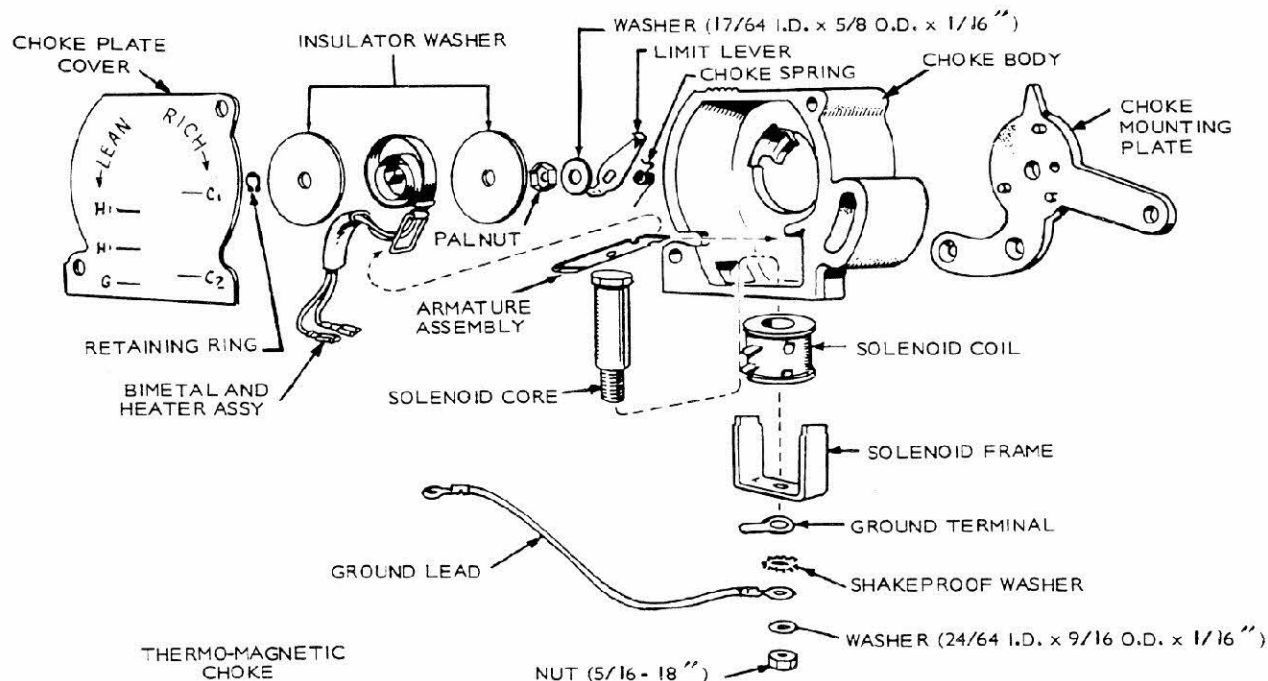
THERMAL MAGNETIC CHOKE ASSEMBLY
